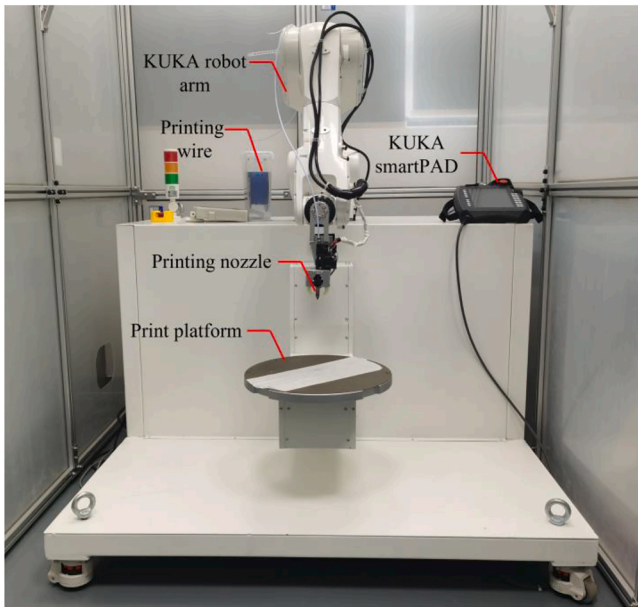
Photo of multi-axis AM machine used in the printing test.
